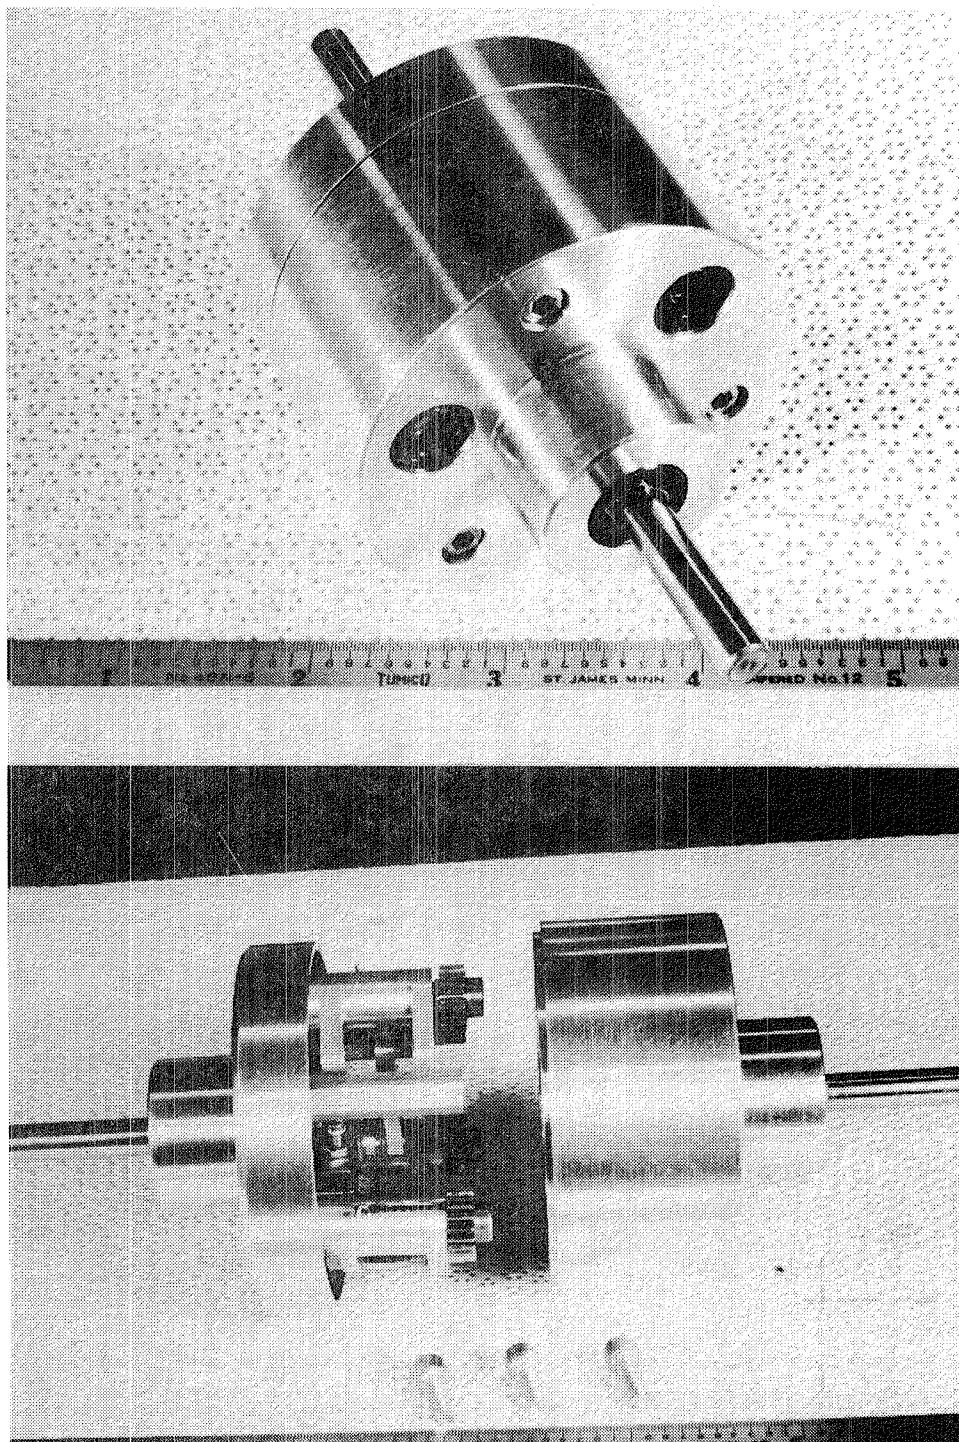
Photographs of Model 3NX showing the general view of (a) -upper photo, the complete device (note the scale), and (b) -lower photo, a view of its two major components. Input shaft and the transmission parts are all mounted on the same flange.
